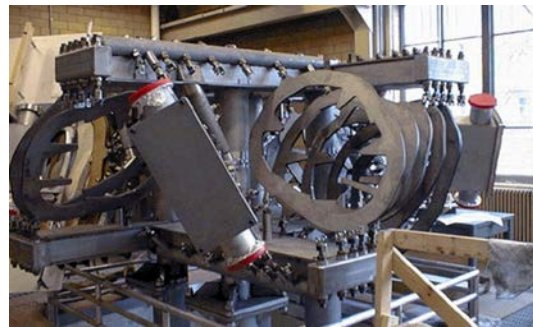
Box-beam structure holding some support rings. Coils are not installed yet in this picture. Reproduced from [117].
